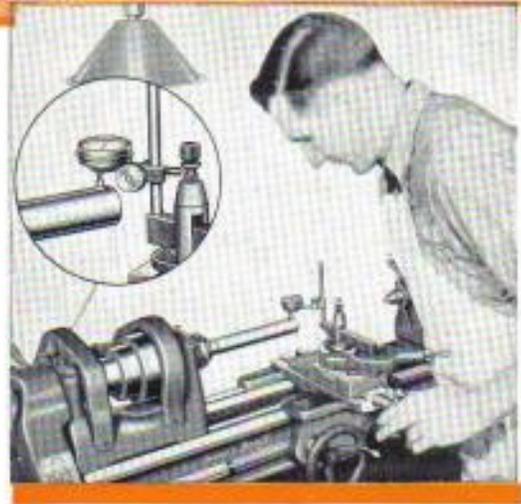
Testing Alignment of Headstock Spindle with Lathe Bed, Using 6" Test Bar and Dial Indicator.
